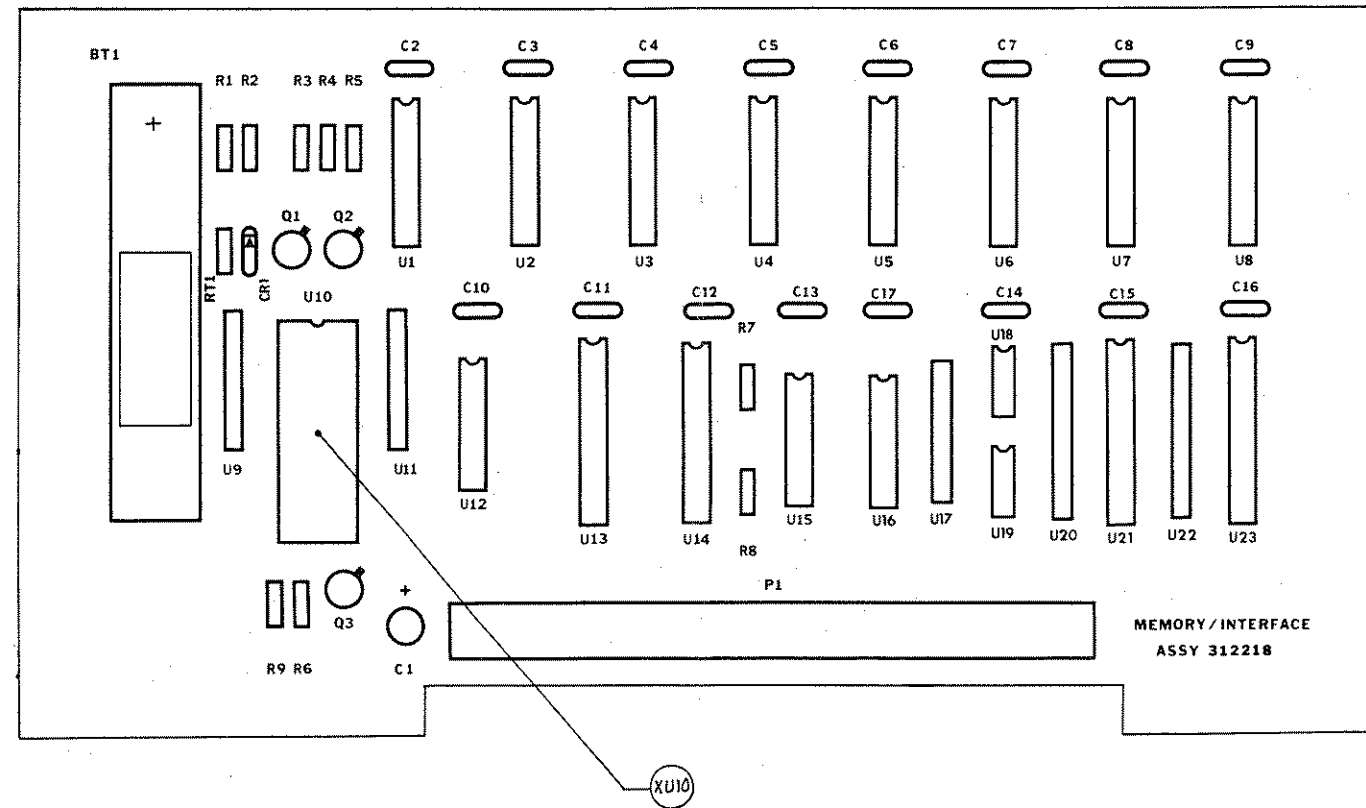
Memory/Interface Assembly (A5), Component Location
